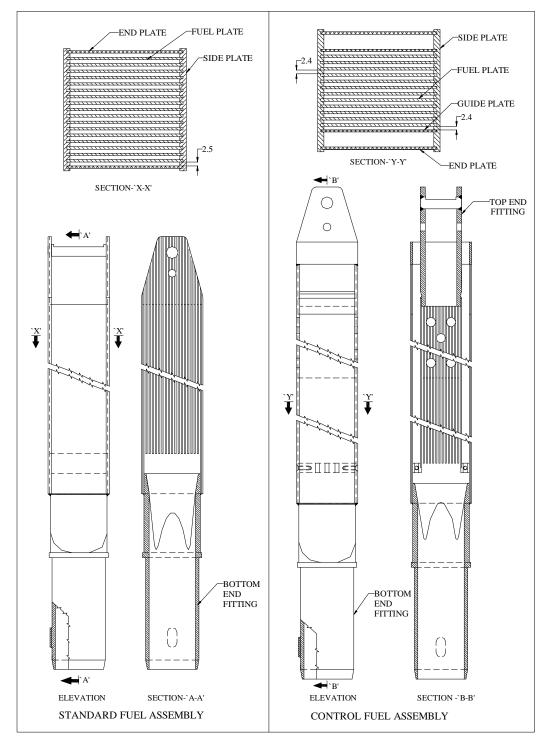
General arrangement details of standard fuel assembly and control fuel assembly
